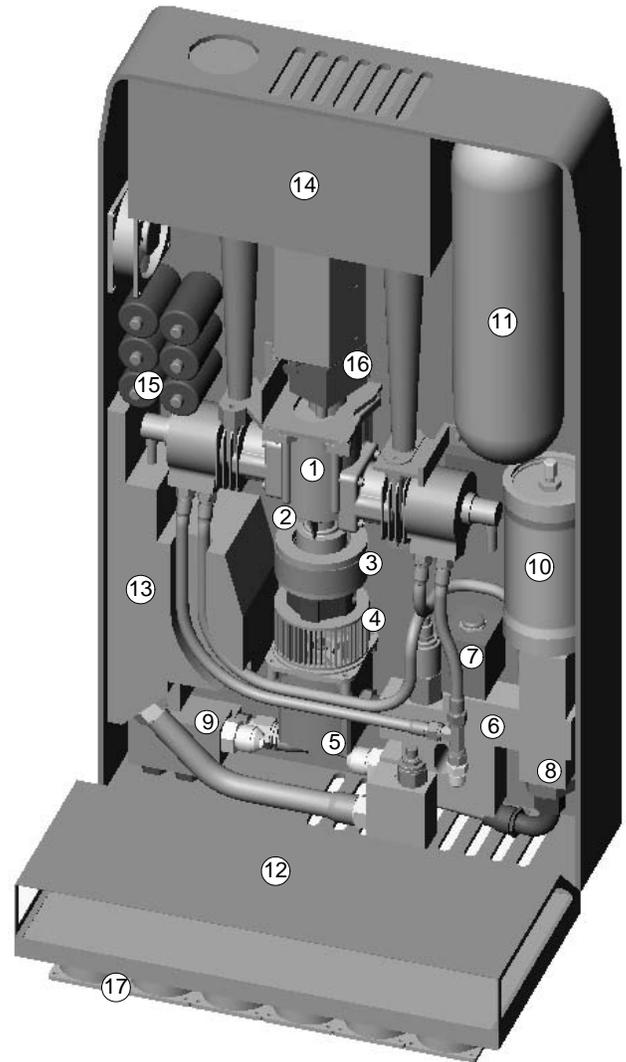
HEPU physical layout. Engine (1); shaft (2, not visible); alternator (3); cooling fan (4); gear pump (5); manifold (6); solenoid valve (7); filter (8, not visible); pressure transducer (9, not visible); accumulator (10); nitrogen tank (11); heat exchanger (12); hydraulic reservoir (13); muffler (14); batteries (15); carburetor and throttle (16); heat exchanger fans (17). Internal baffling around engine is not shown for clarity.
